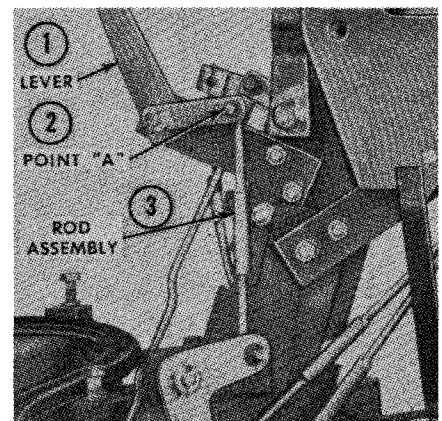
On 8000-9000 models, adjust length of transmission brake rod assembly (3) so that lever (1) clears ends of slot in console in both "ON" and "OFF" detent positions. Disconnect rod at point "A" (2) to make adjustment.
